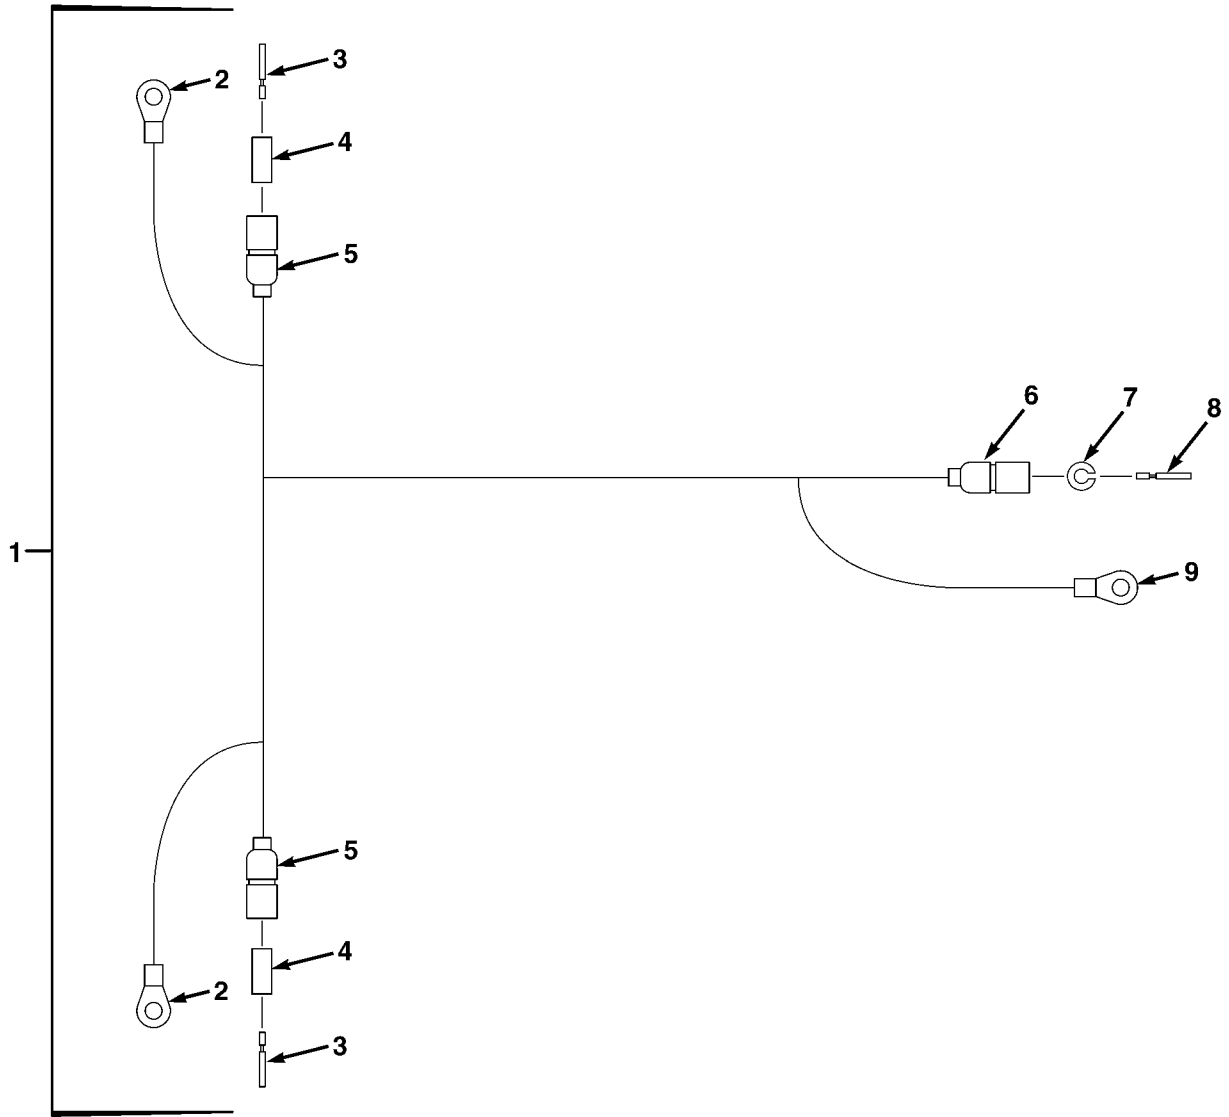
SIDE CLEARANCE LIGHT HARNESS
